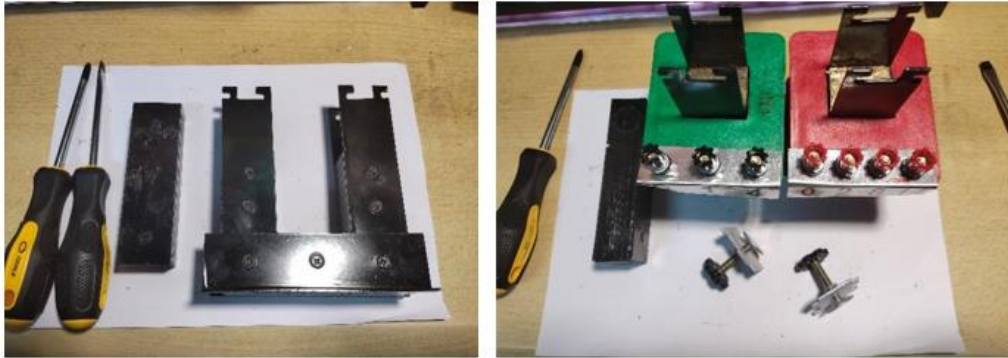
Assembling the U-Core, Screwing Back, and Assembling the Transformer.
